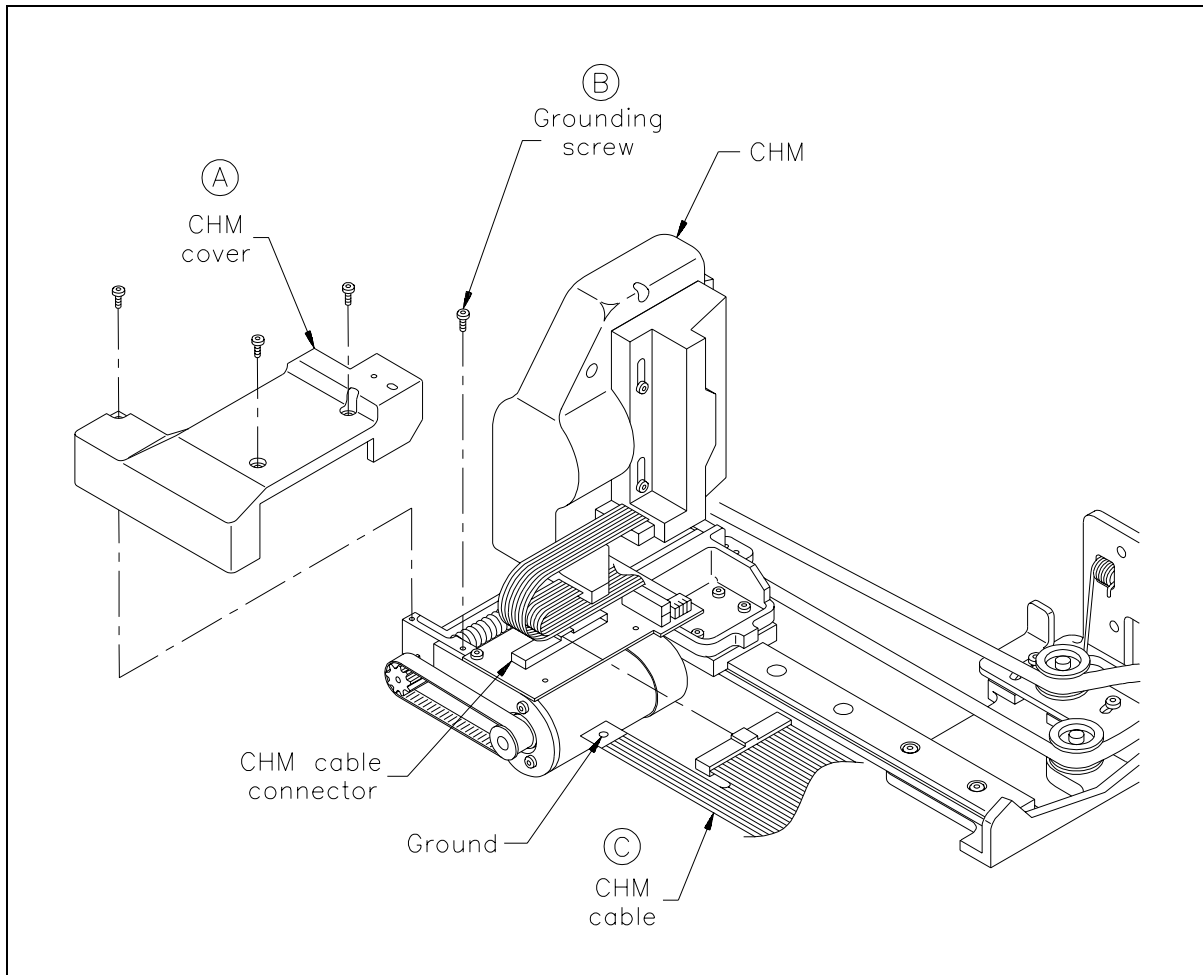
Removing the grounding screw, cover, and CHM cable from the CHM
